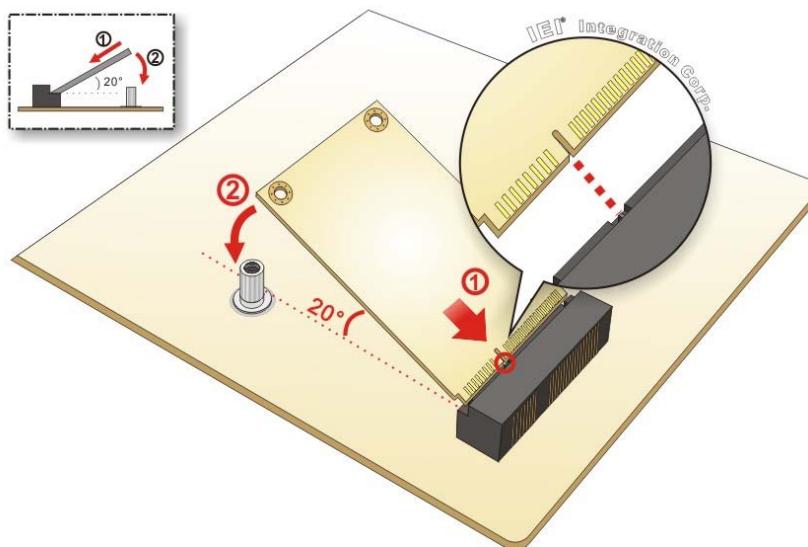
Insert the PCIe Mini Card into the Socket at an Angle
